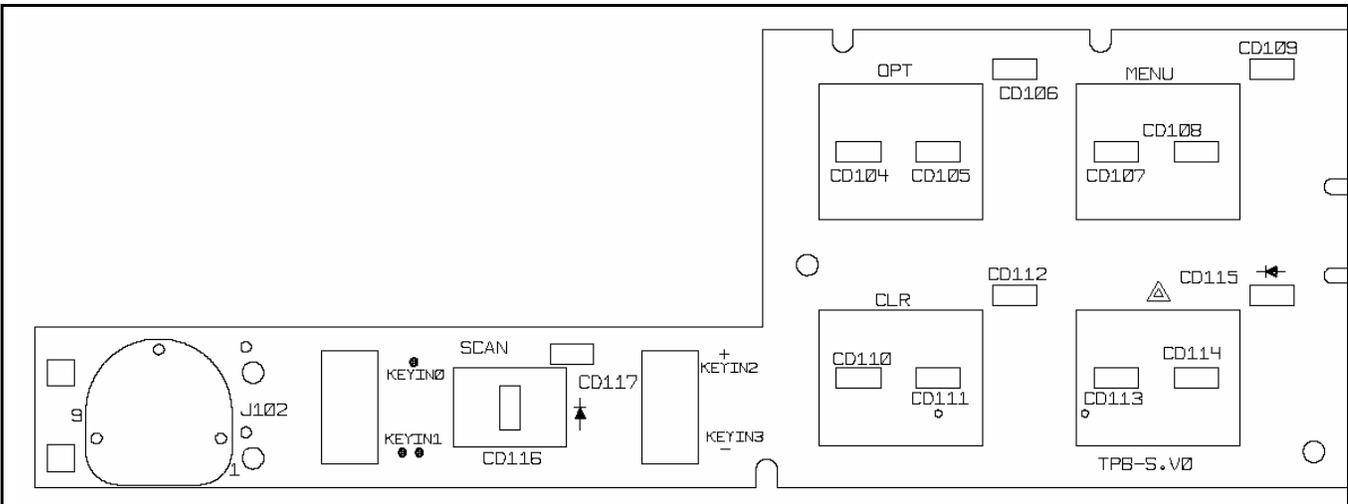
Switch Circuit CDF-368BC Solder Side
